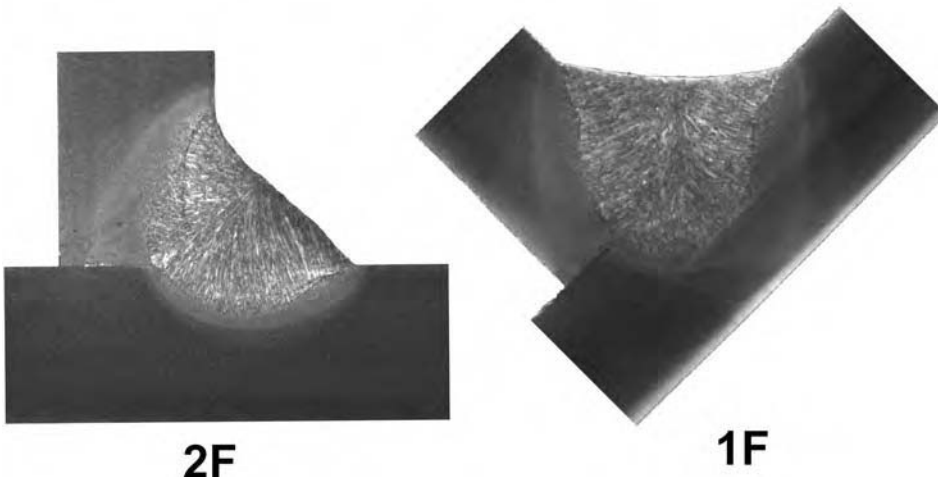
Fillet welds, 8 mm (0.31 in.)
